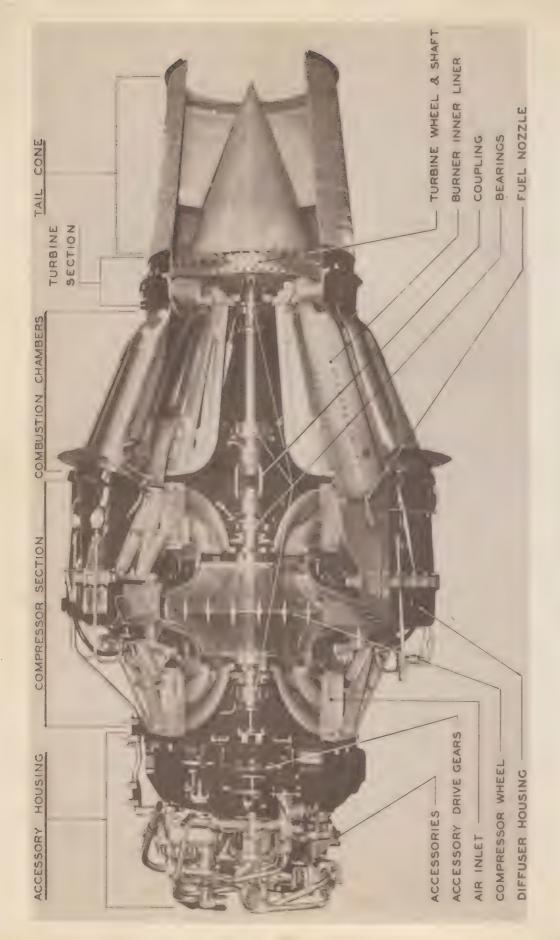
A cut-away drawing of the Allison J33 turbojet.
